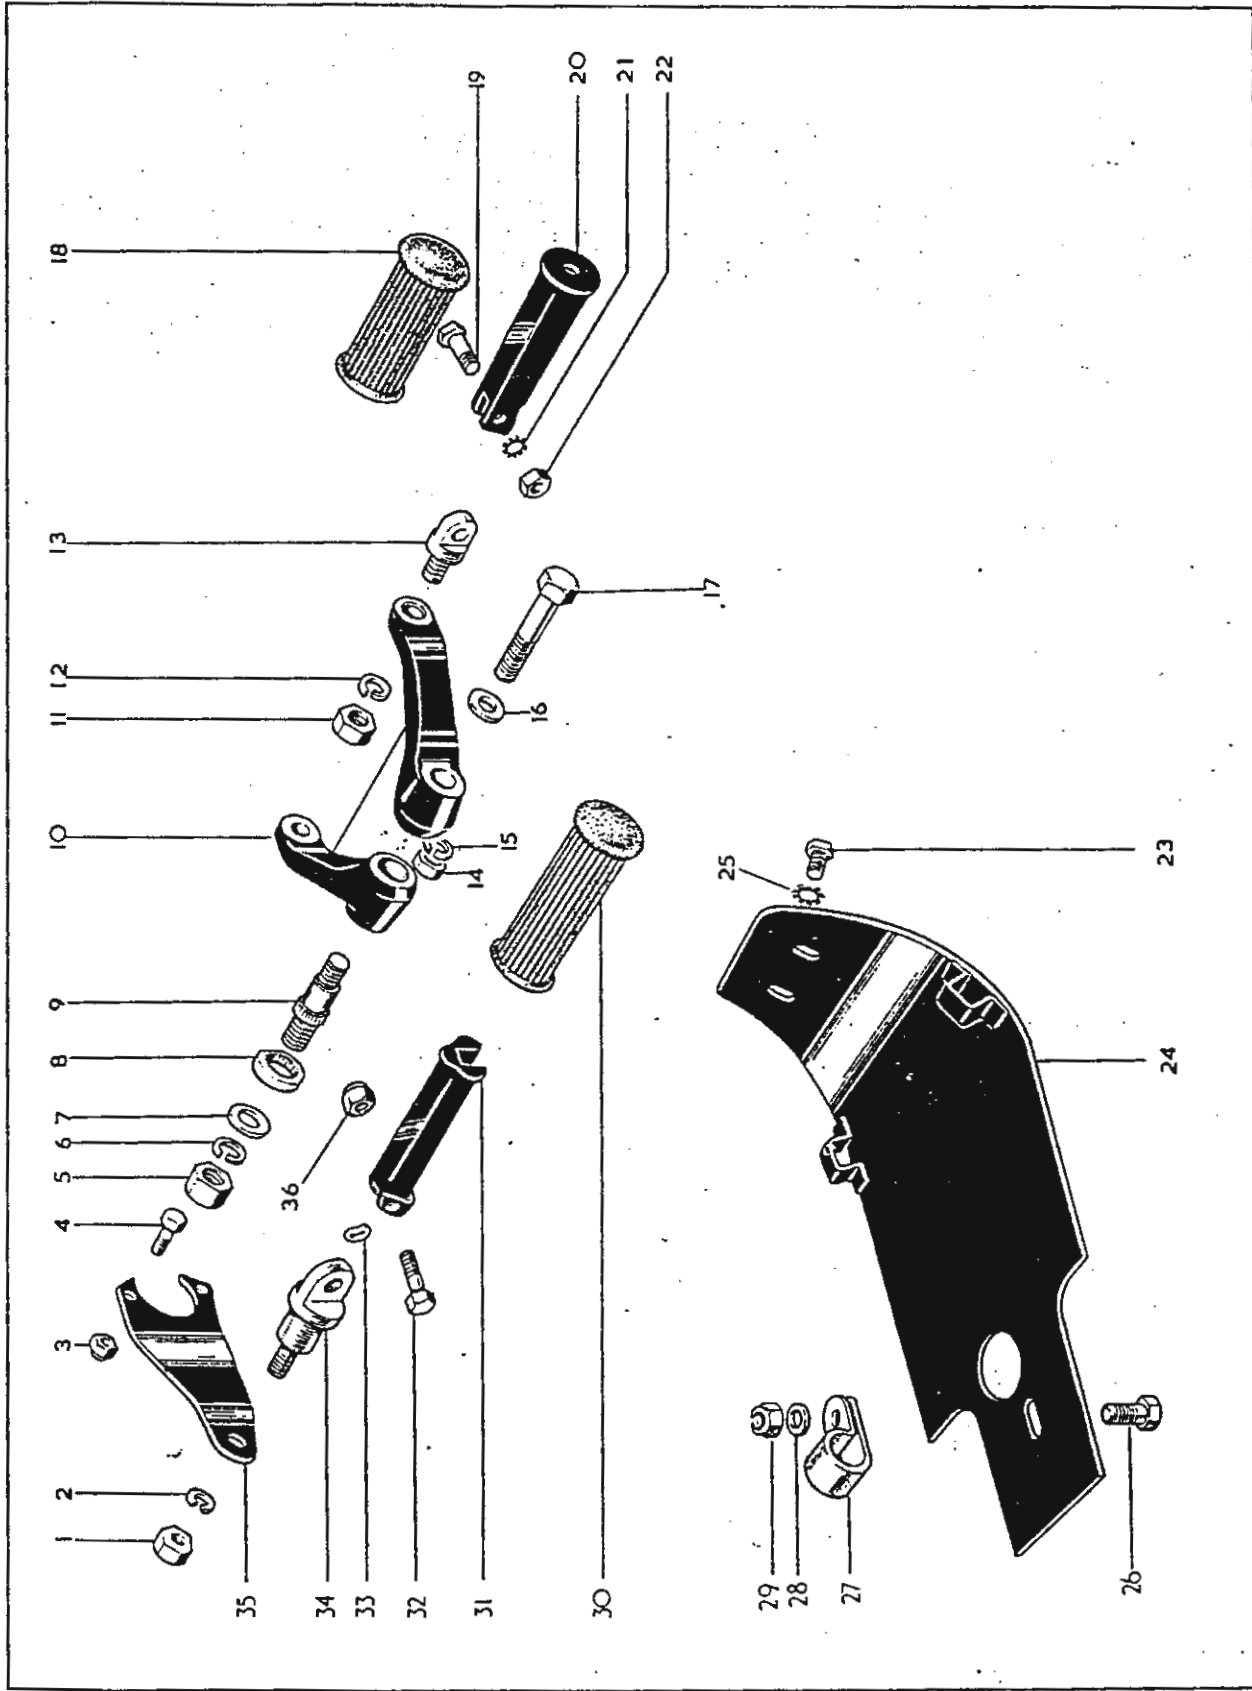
ENGINE SHIELD, PLAQUE D'APPUI POUR MOTOR, MOTORABSTÜTZBLECH, PLACA DE APOYO DEL MOTOR FOOTRESTS, REPOSE-PIED, FUSSRASTE, DESCANSA-PIE
